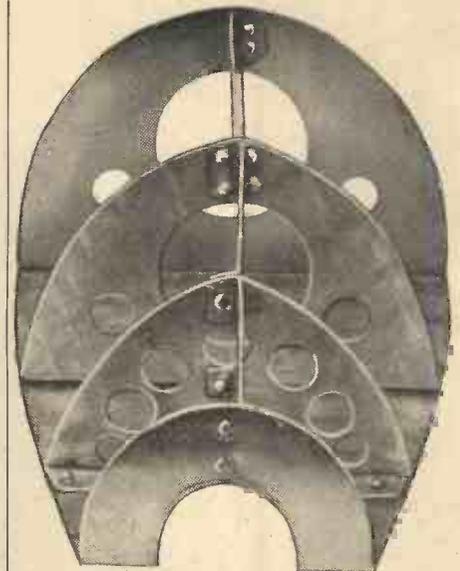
Underneath view of the combined engine cradle and fuselage nose.
